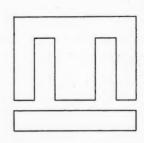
(Left)—The Waste is the "E" Pieces Can Be Used the "I" Pieces. Fig. 2 (Abon —Drawing Showing Proposition Necessary to Make Parts Mate
